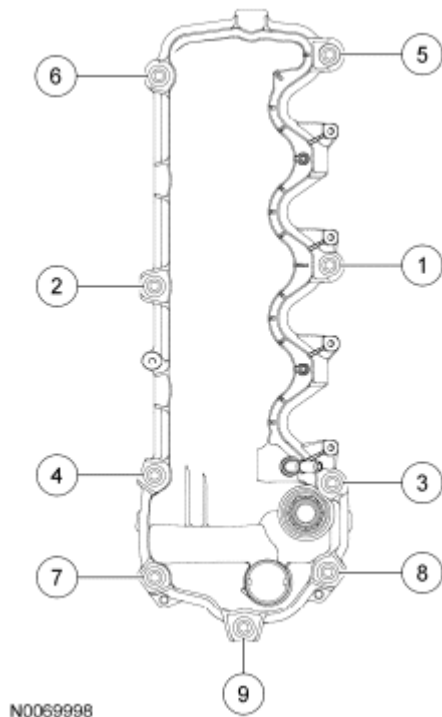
Identifying Cylinder Head Bolt Tighten Sequence
